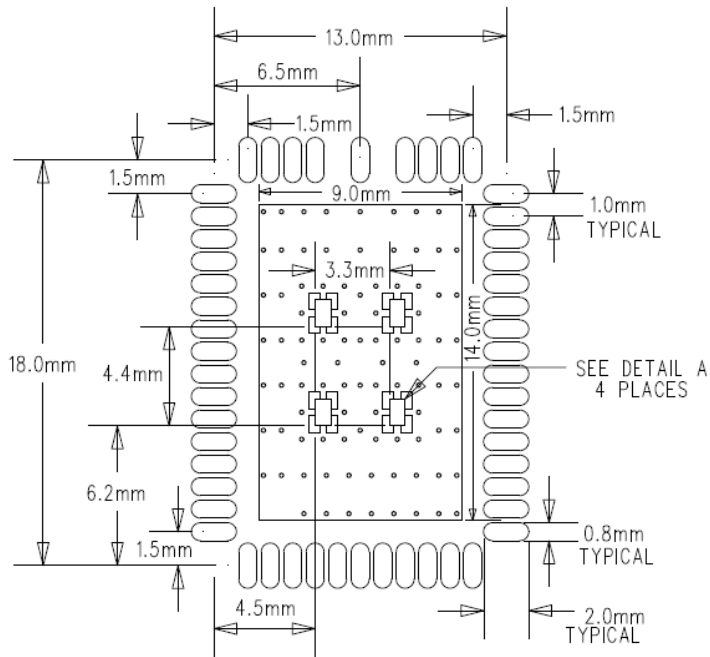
Module Mechanical Dimensions (Maximum Module Height = 1.9 mm)
